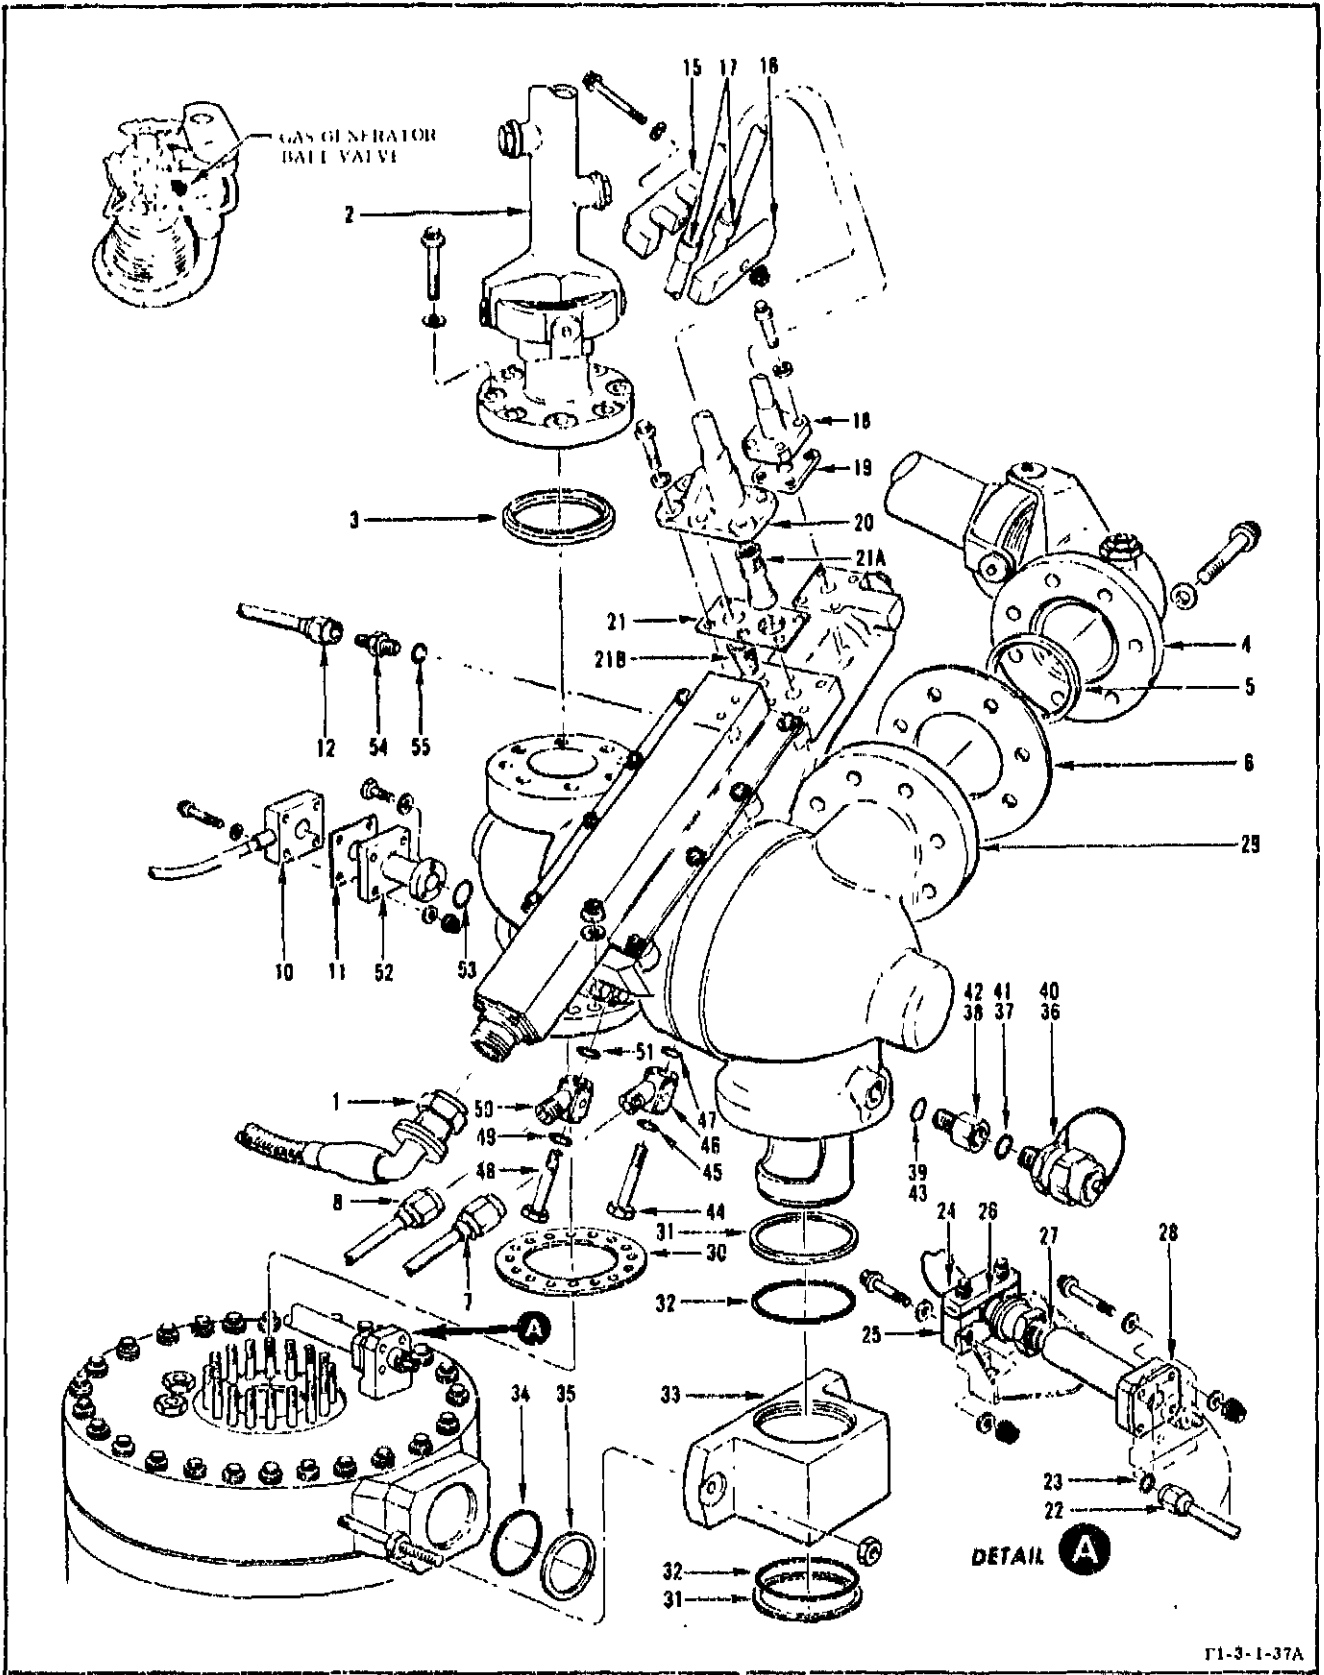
Gas Generator Ball Valve (Sheet 1 of 2)
